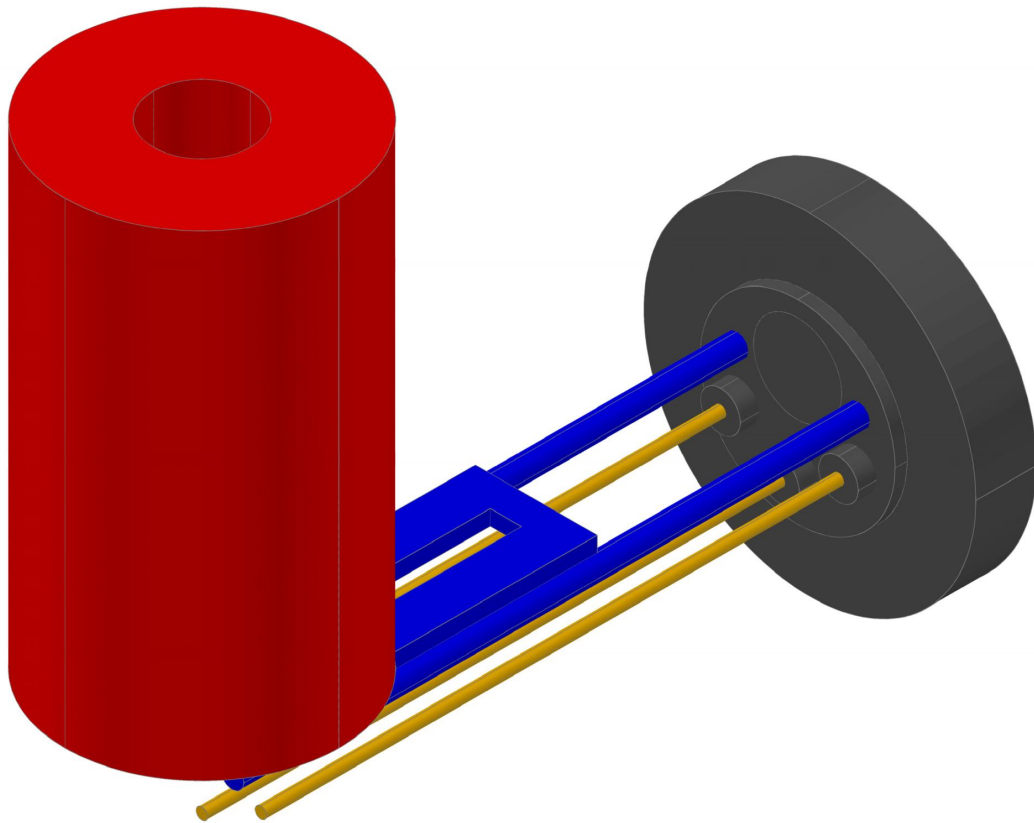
Three-dimensional rendering of the design for the thermal source, mount, and feedthrough. The $2\frac{3}{4}$ " ConFlat flange (grey), stainless supports (blue), power connectors (yellow), and the Radak evaporator (red) are shown.
